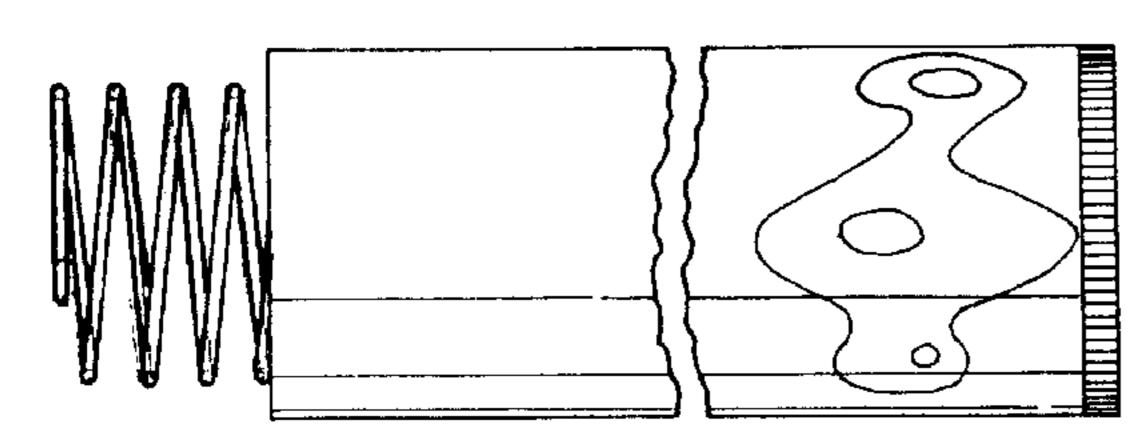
is an exploded back elevational view of the hose and nozzle cover of FIG. 1;
